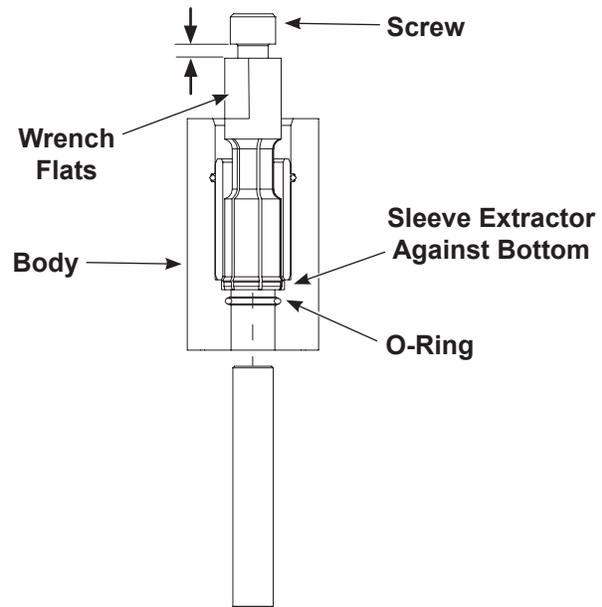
Sleeve Extractor and Drift Pin (Exploded View)
